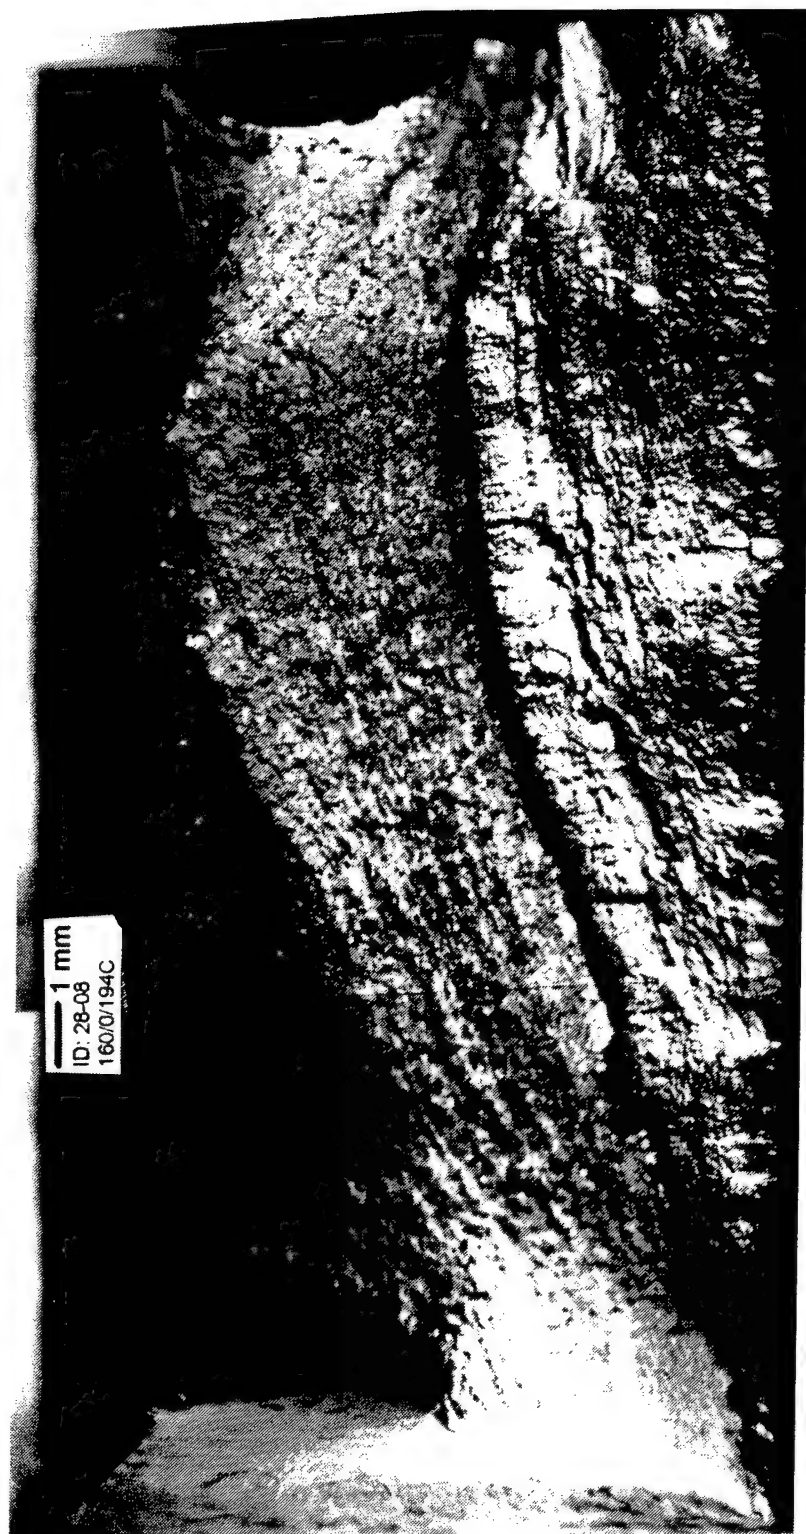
Fatigue fracture surface of the HSLA-80 but weld sample subjected to constant amplitude loading:
